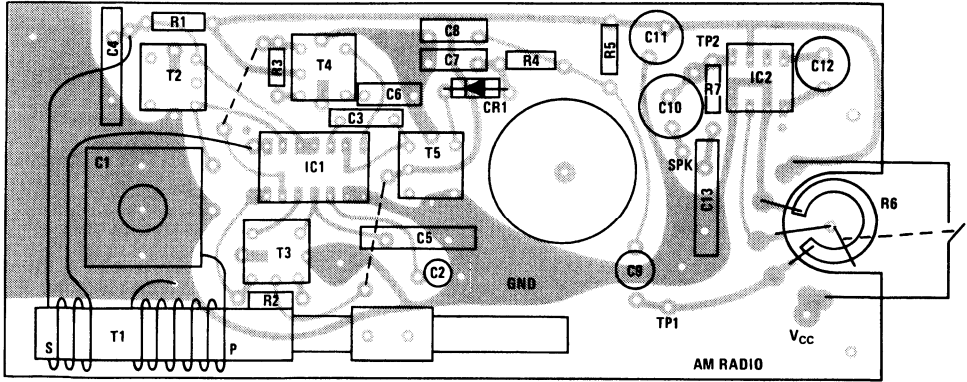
Typical Printed Circuit Board Radio Layout (Bottom View) (Not Shown Full Size)
